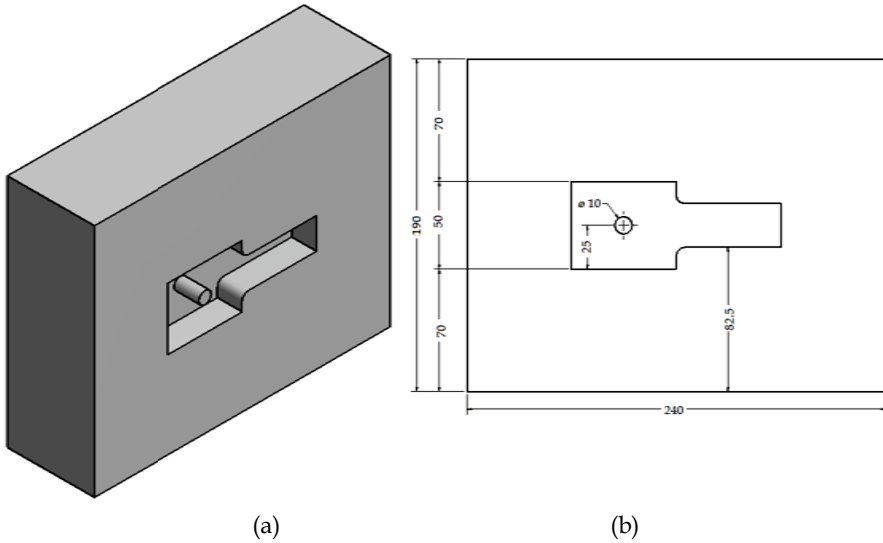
The cast part and mold in (a) three dimensional and (b) bi dimensional
